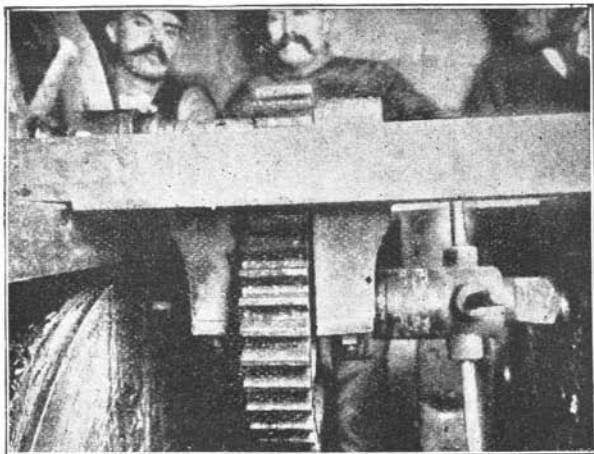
STEAMER UMBRIA—THE LATERAL DRILLING MACHINE BORING THE SHAFT COLLARS.
